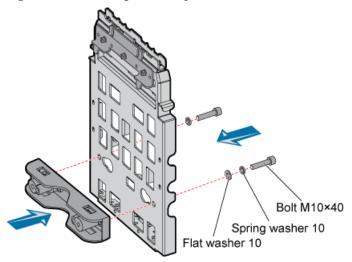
Securing the multi-purpose attachment plate to the mounting plate
